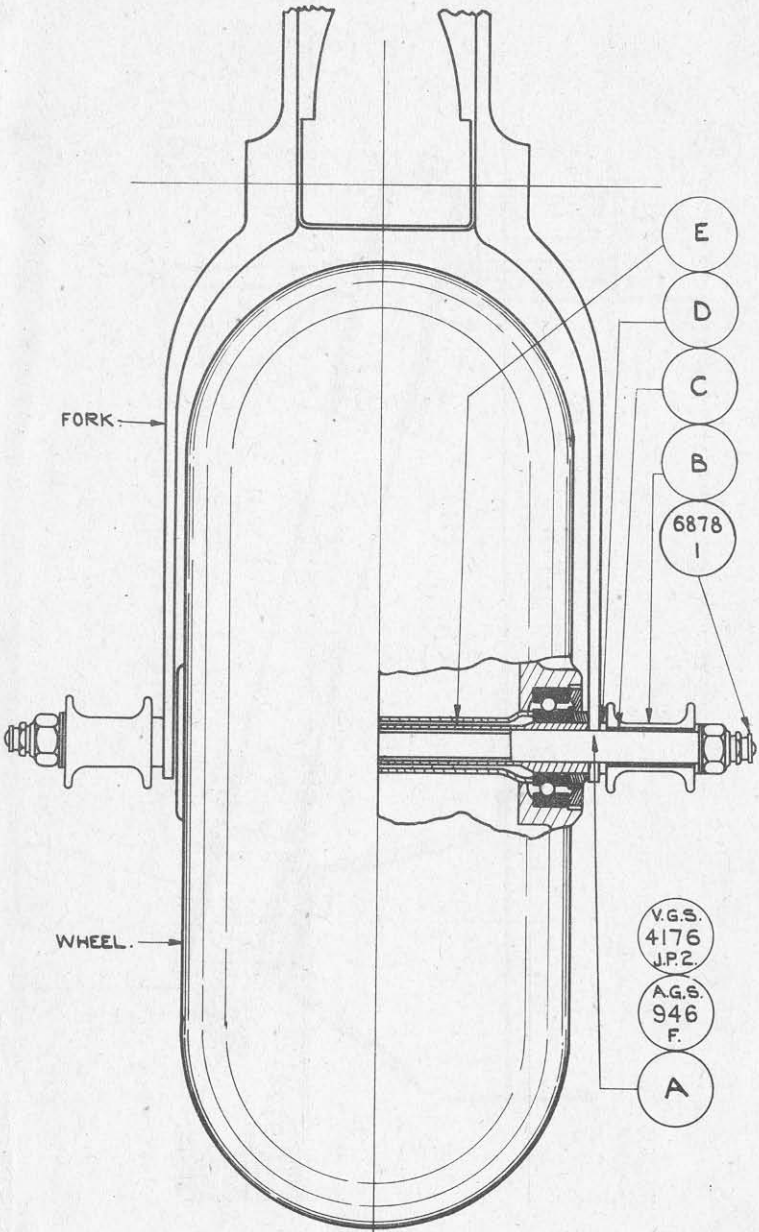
B. PNEUMATIC TAIL WHEEL UNIT
